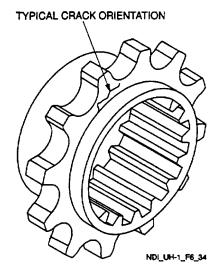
Tail Rotor Control Tube and Quill - Sprocket.
